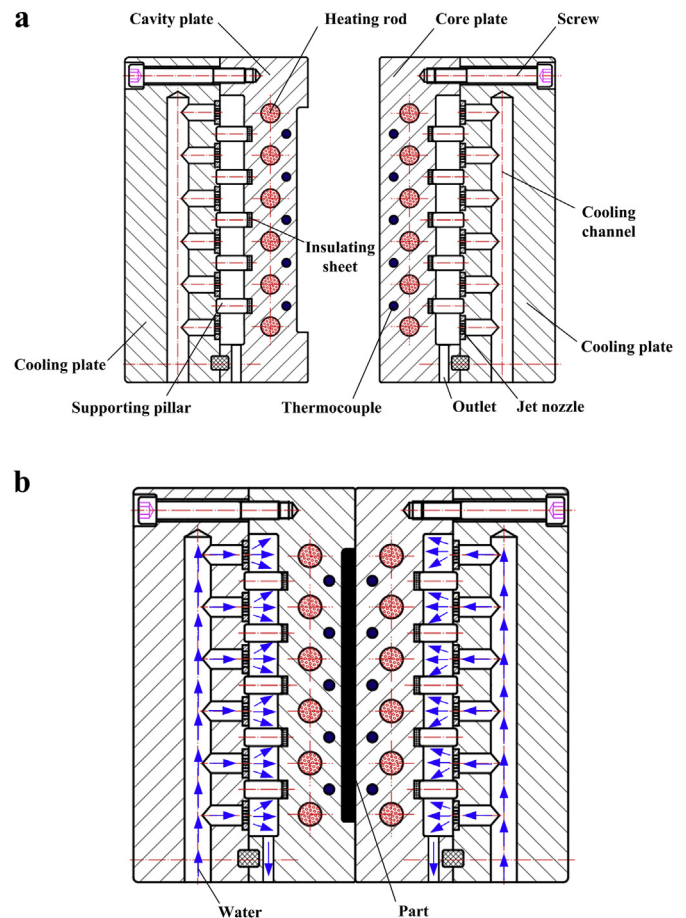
Typical mold structure of proposed RTCM technology with electric heating and water impingement cooling. a: Mold in opening state; b: mold in closing state.
